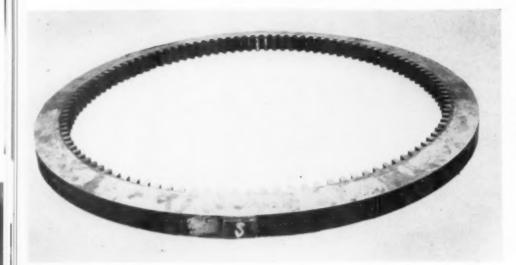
Ring gear for locomotive crane is 90 inches in diameter. Tooth contours are cut to finish size by guided flame.
